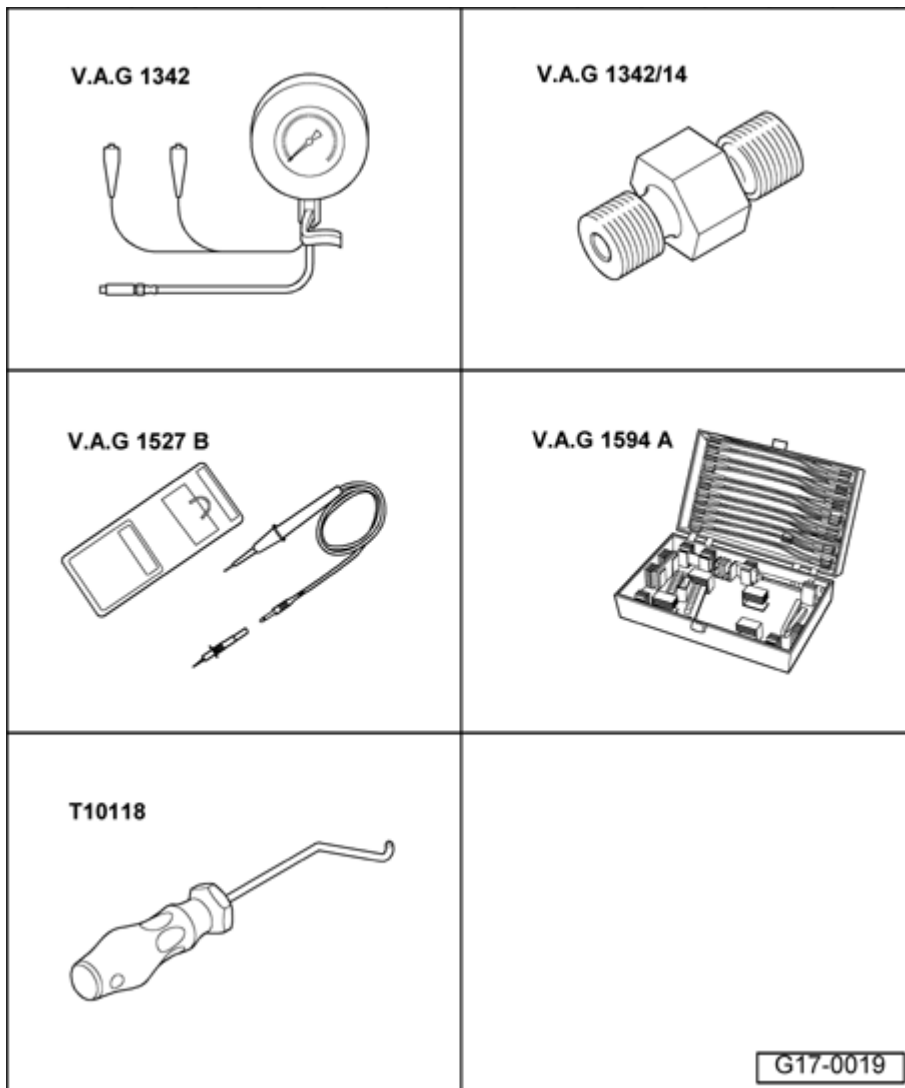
Identifying Special Tools - Oil Pressure And Oil Pressure Switch, Checking
